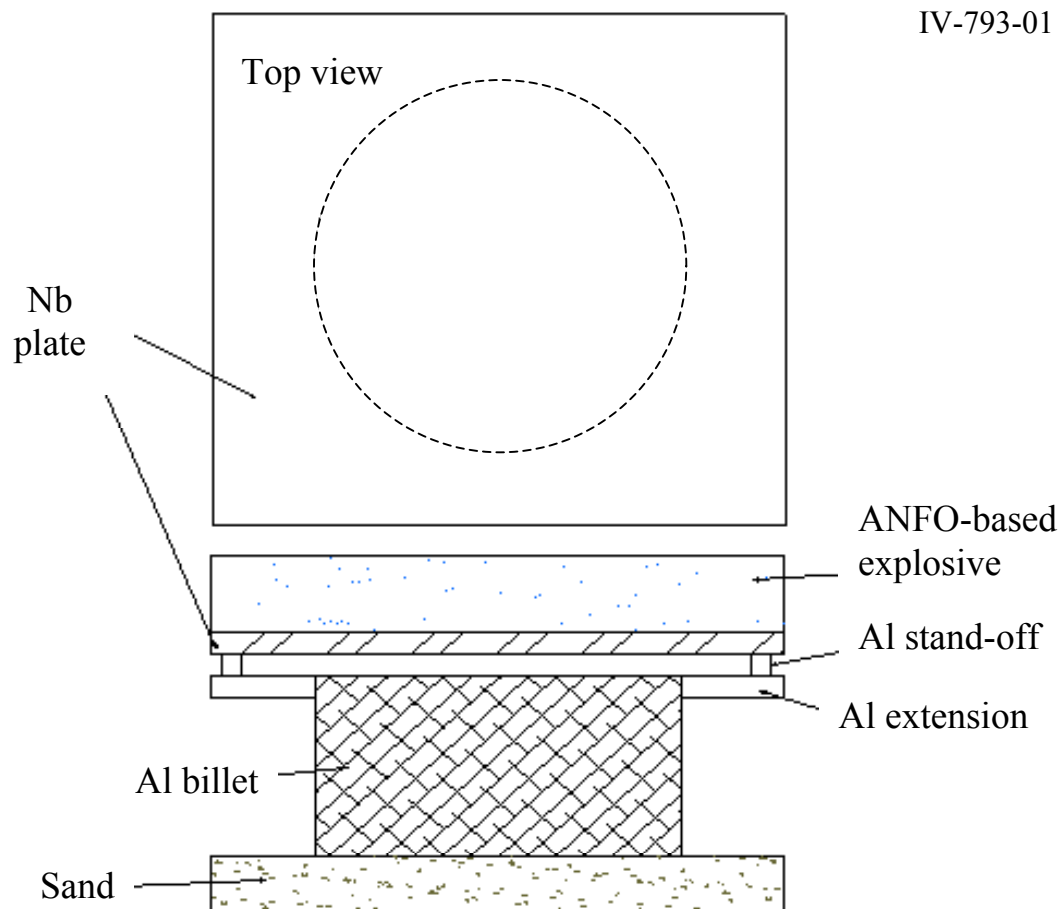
Schematic drawing of the explosive welding setup. The cylindrical aluminum billet is clad using an oversized square Nb plate to promote good bonding near the edge of the aluminum billet.
